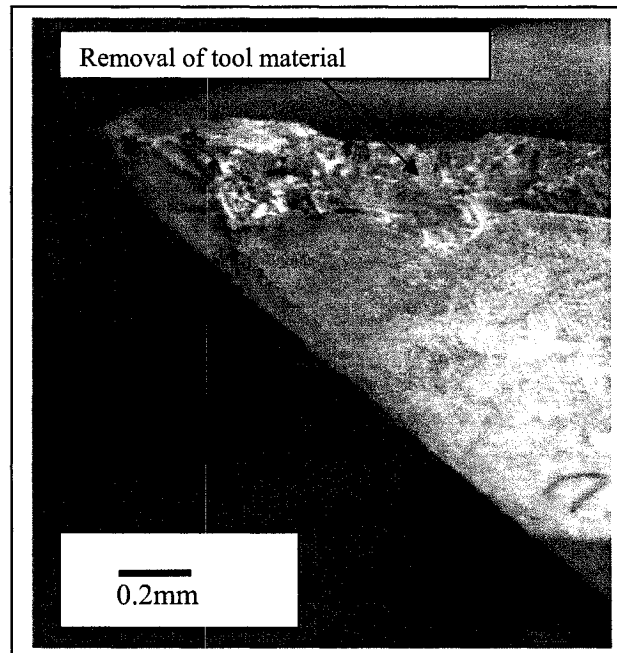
Wear surface, cutting speed = 90 m/min (1505 rpm), depth of cut = 3.3 mm, feed = 0.025 mm/tooth, unstable (chatter)
